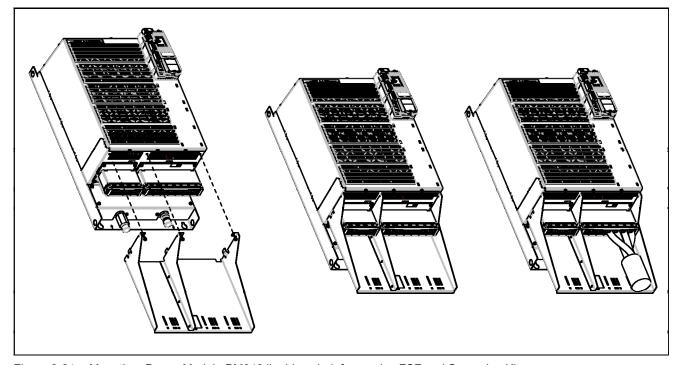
Mounting: Power Module PM340 liquid cooled, frame size FSF and Screening Kit
